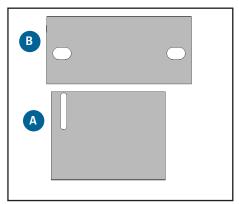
Front (A) and rear (B) kickplate junction pieces.
